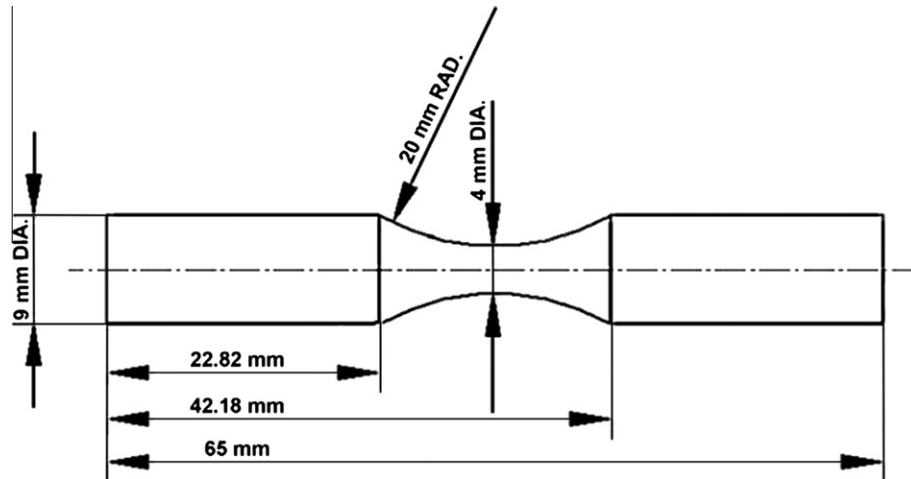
The dimensions of rotating bending fatigue test specimen.
